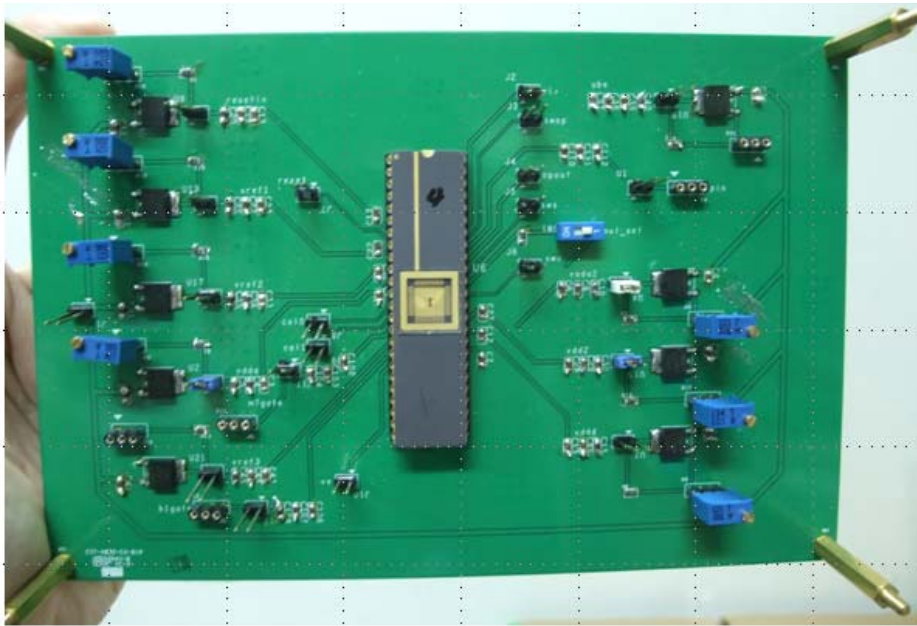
The PCB design of 3T current mode sensor test-chip
